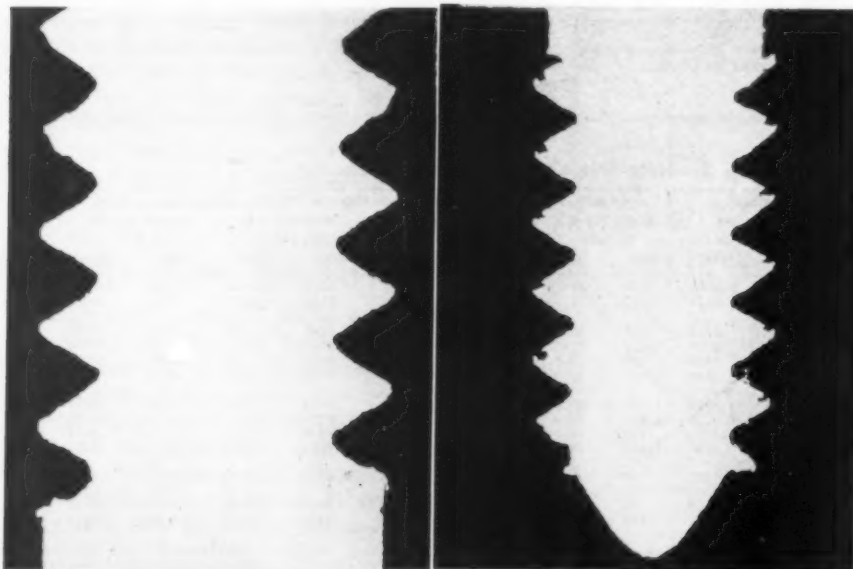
Sections of miniature screw threads: (extreme left) die-cut, stainless steel, 339 threads per inch; (left) spun thread, 282 threads per inch.
